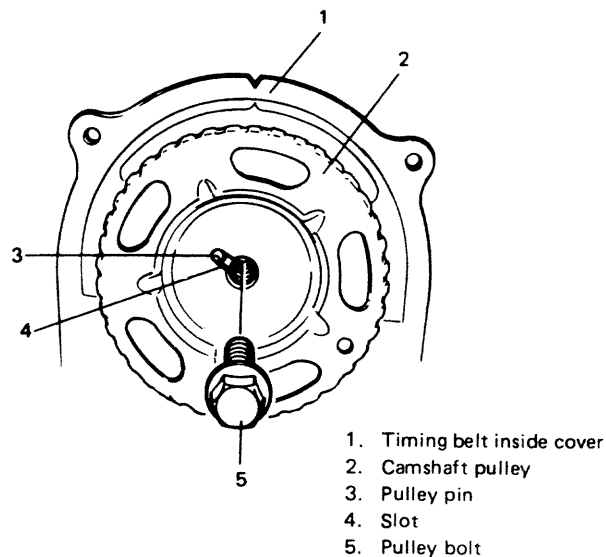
Pulley pin, slot and pulley bolt
